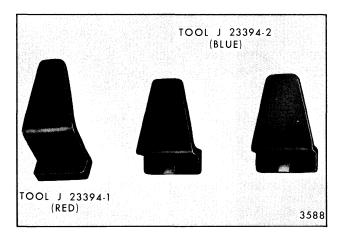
Glass Alignment Gauge Blocks - Tool J-23394 or Equivalent (Consists of a Set of Three Blocks)
